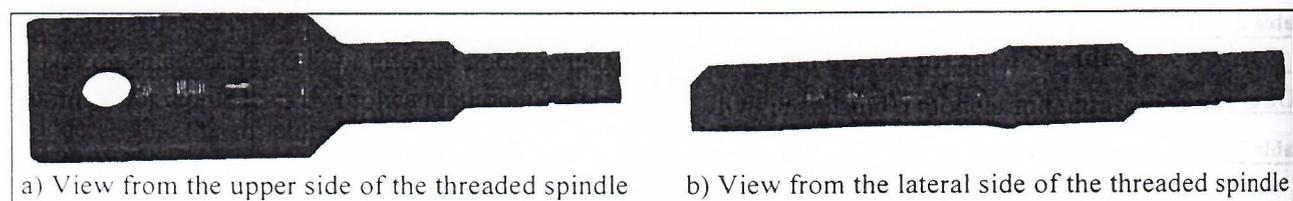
Results of ultrasonic testing performed at the threaded spindle
